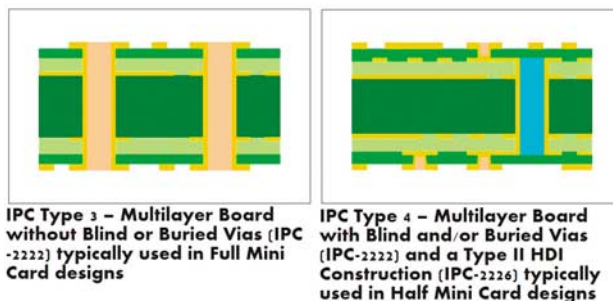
The PCB structure change between Full-Mini Card and Half-Mini Card.
